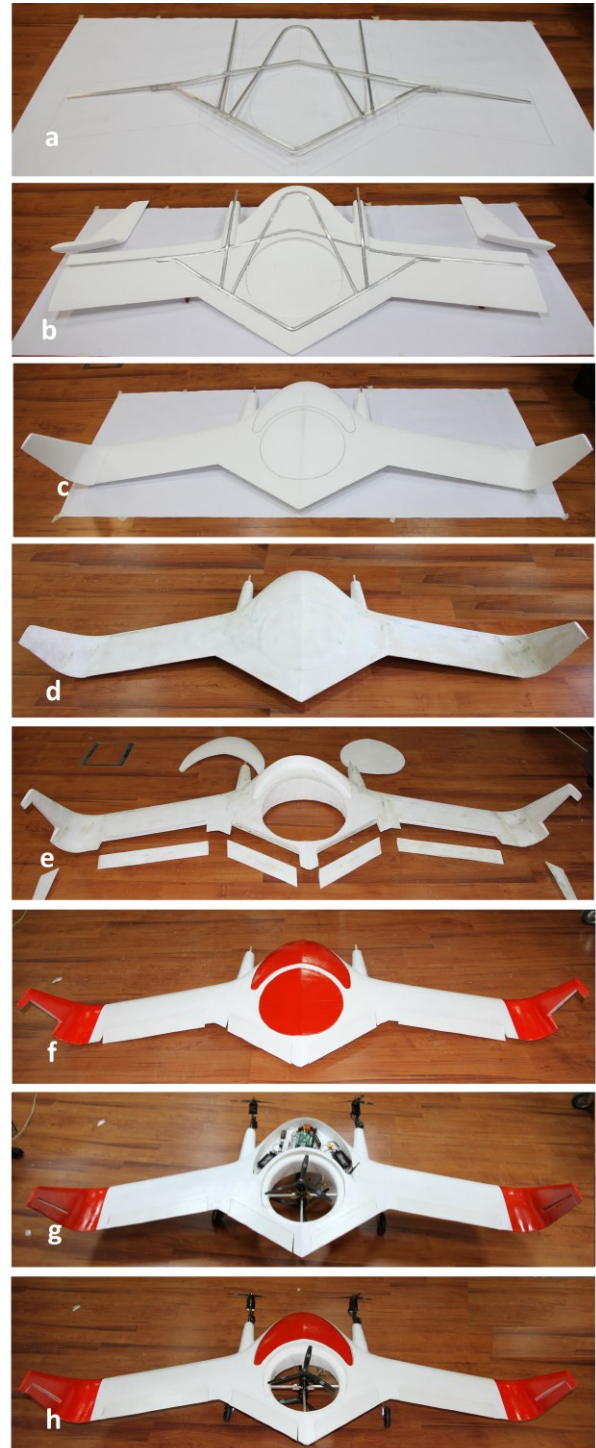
a) Aluminum structure production with technical drawings b) Foam core CNC manufacturing c) Aluminum structure and foam core bonding d) Composite material covering and surface sanding e) Cutting control surfaces f) Painting g) Systems integration h) System check
